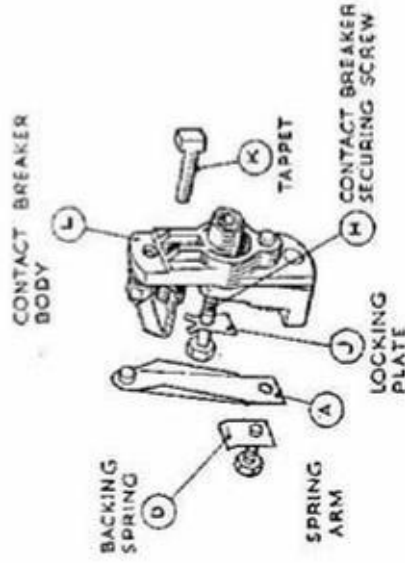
FACE CAM CONTACT-BREAKER OF LUCAS MAGNETO SHOWN DISMANTLED
